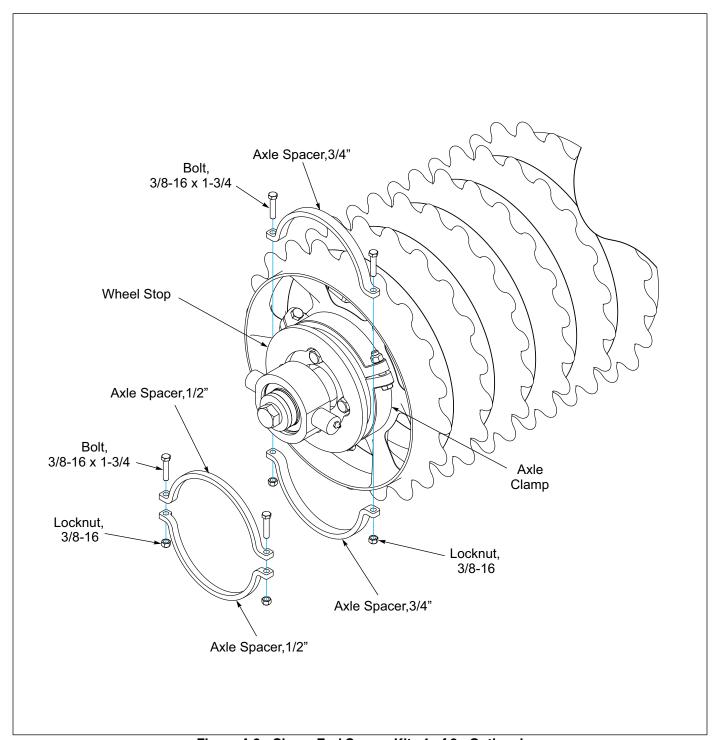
Clamp End Spacer Kits 1 of 2 - Optional
